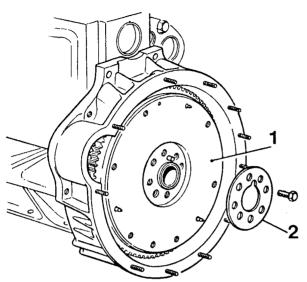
Flywheel location 1 Flywheel 2 Reinforcing plate
